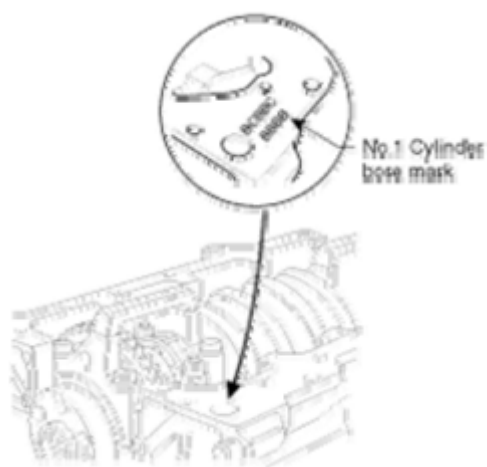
Checking Cylinder Bore Size Code On Cylinder Block Bottom Face
